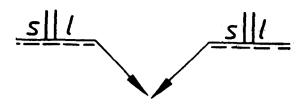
EXAMPLES OF THE PRINCIPLE
